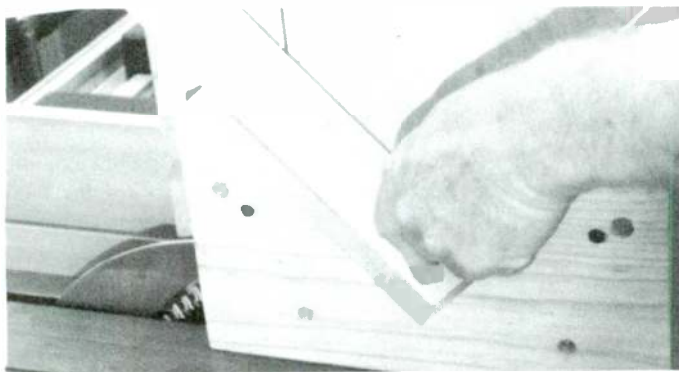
Holding the frame while making the spline cut. This is not a good idea—use clamps!
